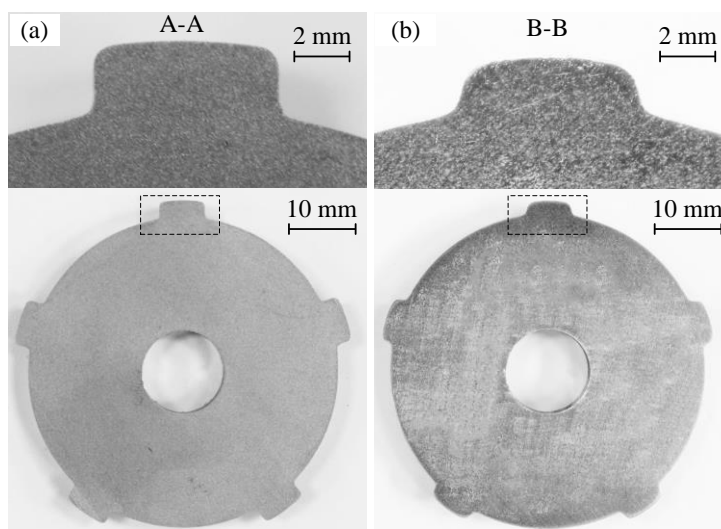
Front views of the machined workpieces. (a) 304 stainless steel; (b) Inconel 718.
